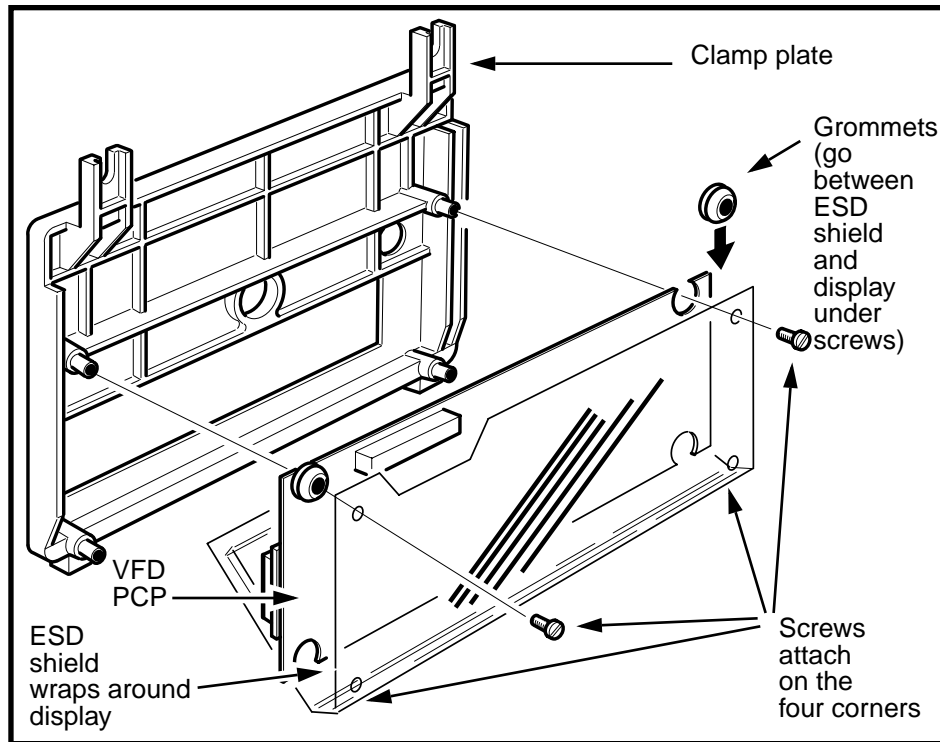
shows an exploded view of how the display fits to the clamp plate.
